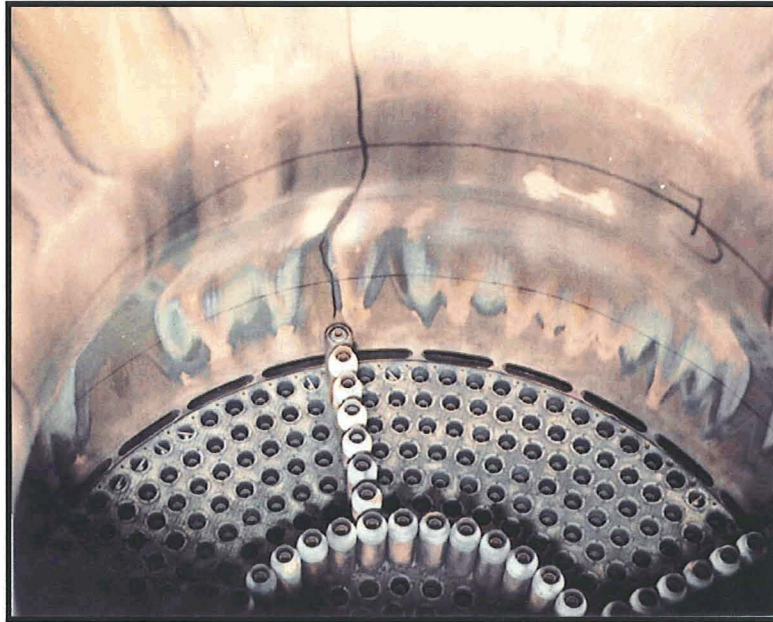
Blanching and cracking—evidence of multi-dimensional environments in a combustion chamber.
